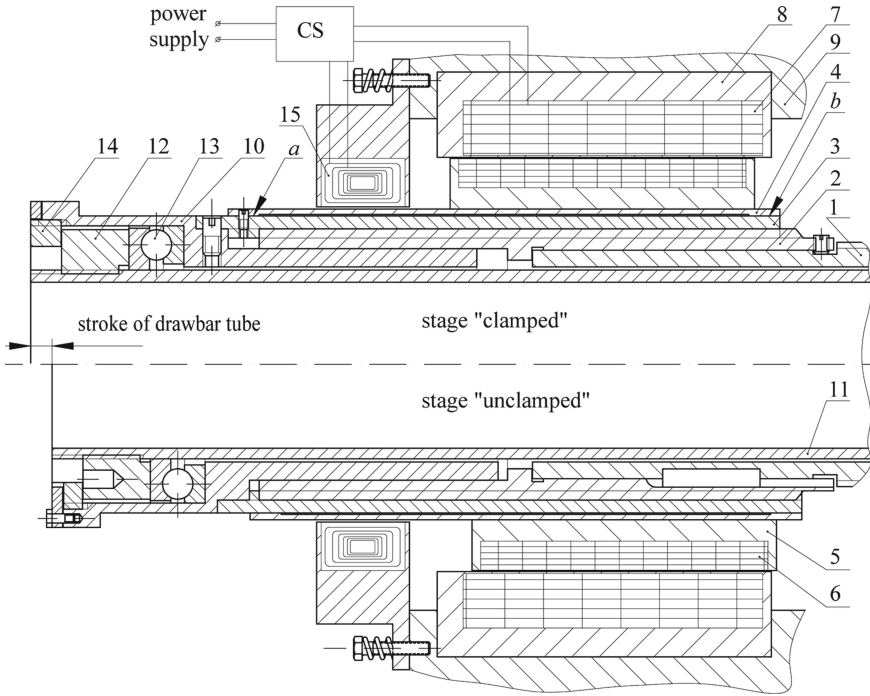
Construction diagram of the drive of the clamping mechanism assembly.
